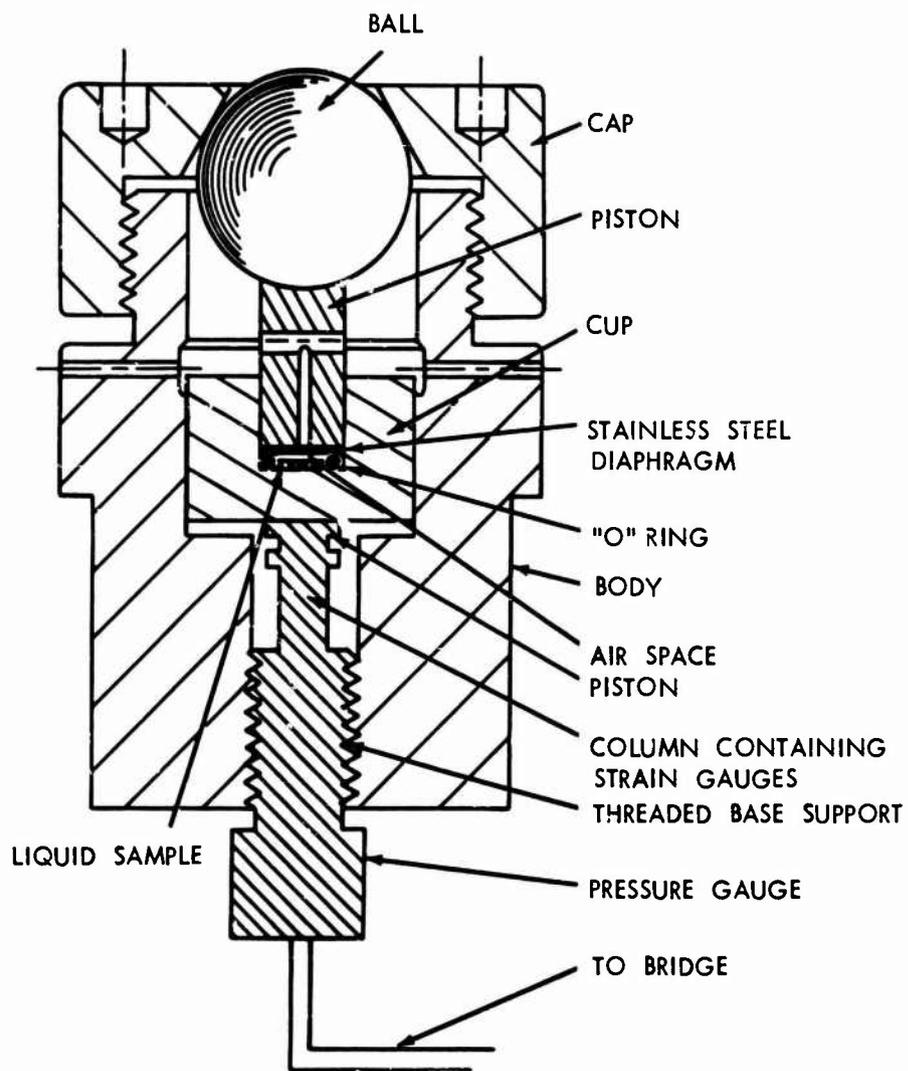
DETAILS OF SAMPLE CUP ASSEMBLY CONTAINING PRESSURE GAUGE
